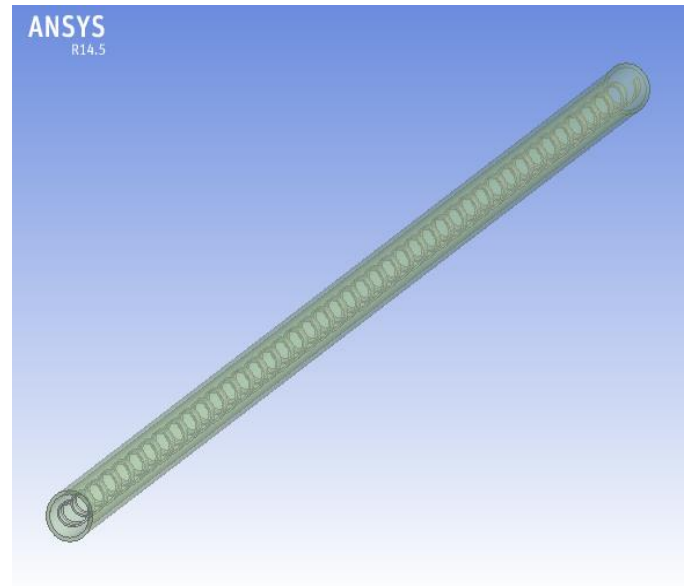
Geometry of rectangular helix insert inside a plain tube
